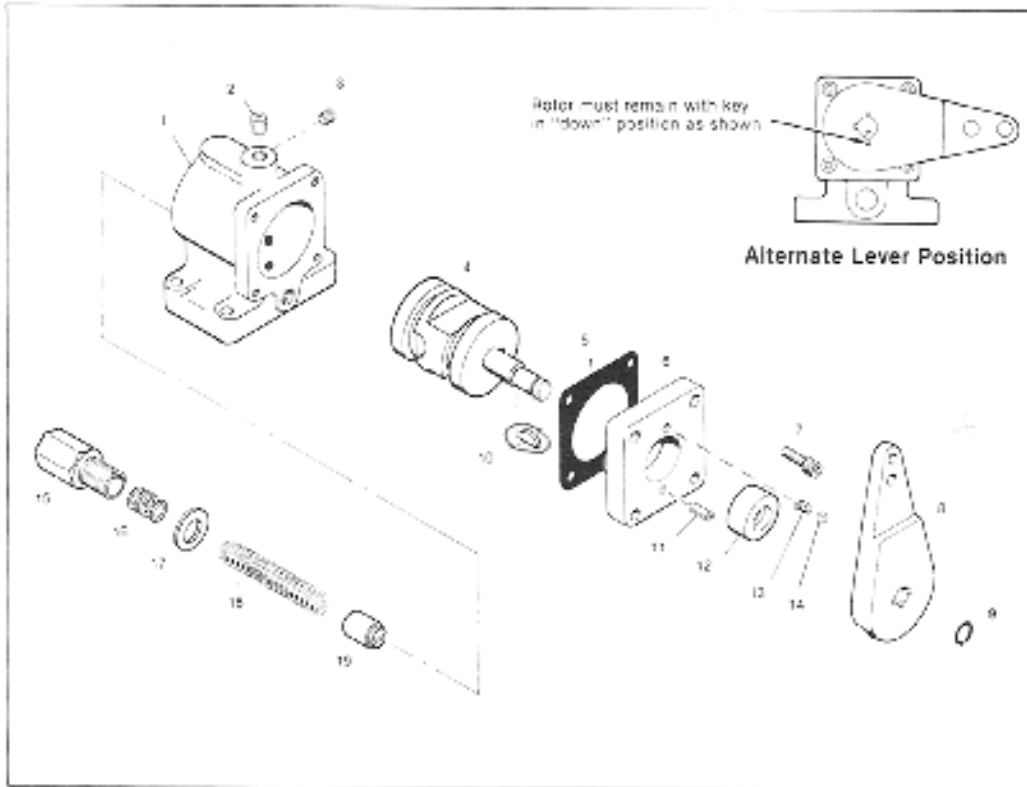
Selector Valve Assembly, no. 1-09427-2000
